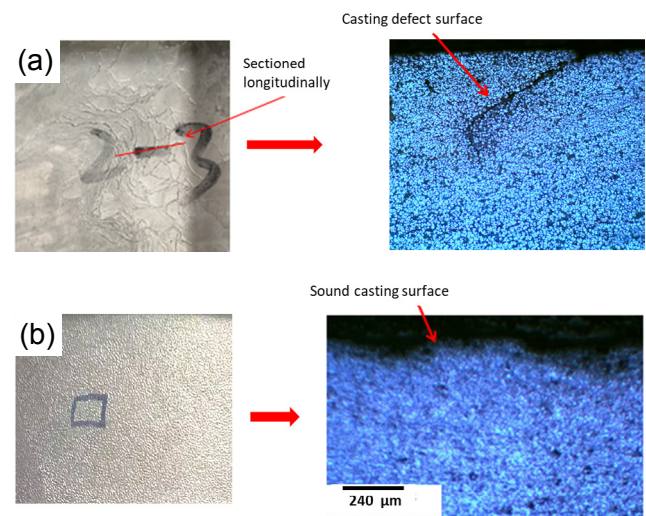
An example showing cast surface defects eliminated with the proper die surface treatment [32]: (a) casting surface defects; (b) surface defect eliminated with die surface treatment
